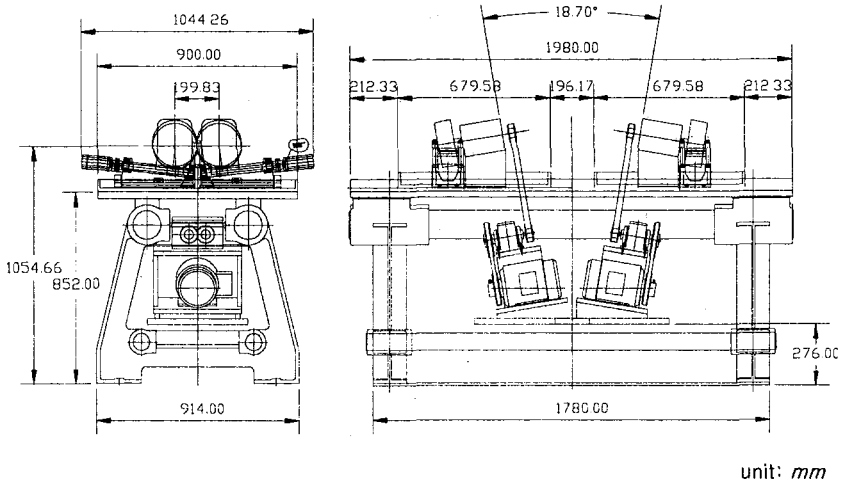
Assembly drawing of the micro-shape edge grinding machine using the tilted-head spindle grinding method
